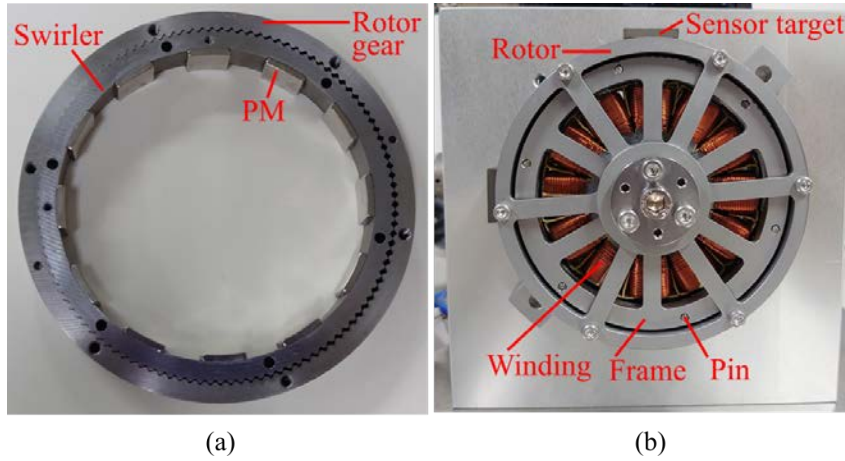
(a) Swirler and rotor. (b) Complete prototype.
